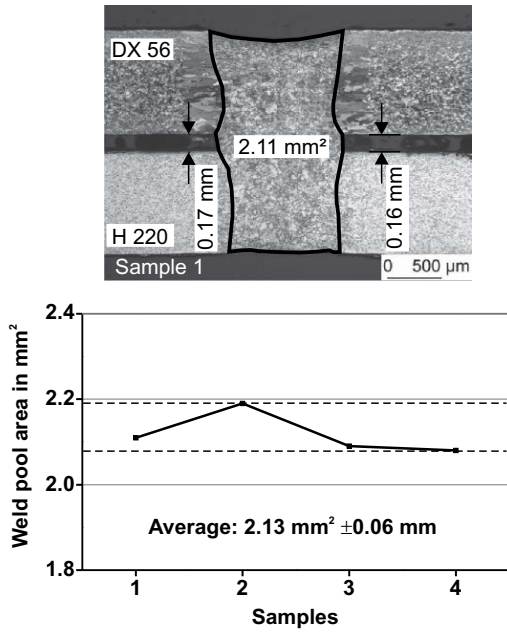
Experimental scatter band of the fusion zone area in cross-section, simplified geometry "parallel weld", laser beam welding, sheet thickness 1 mm, $q = 3.3$ kW and $v_s = 300$ cm/min
